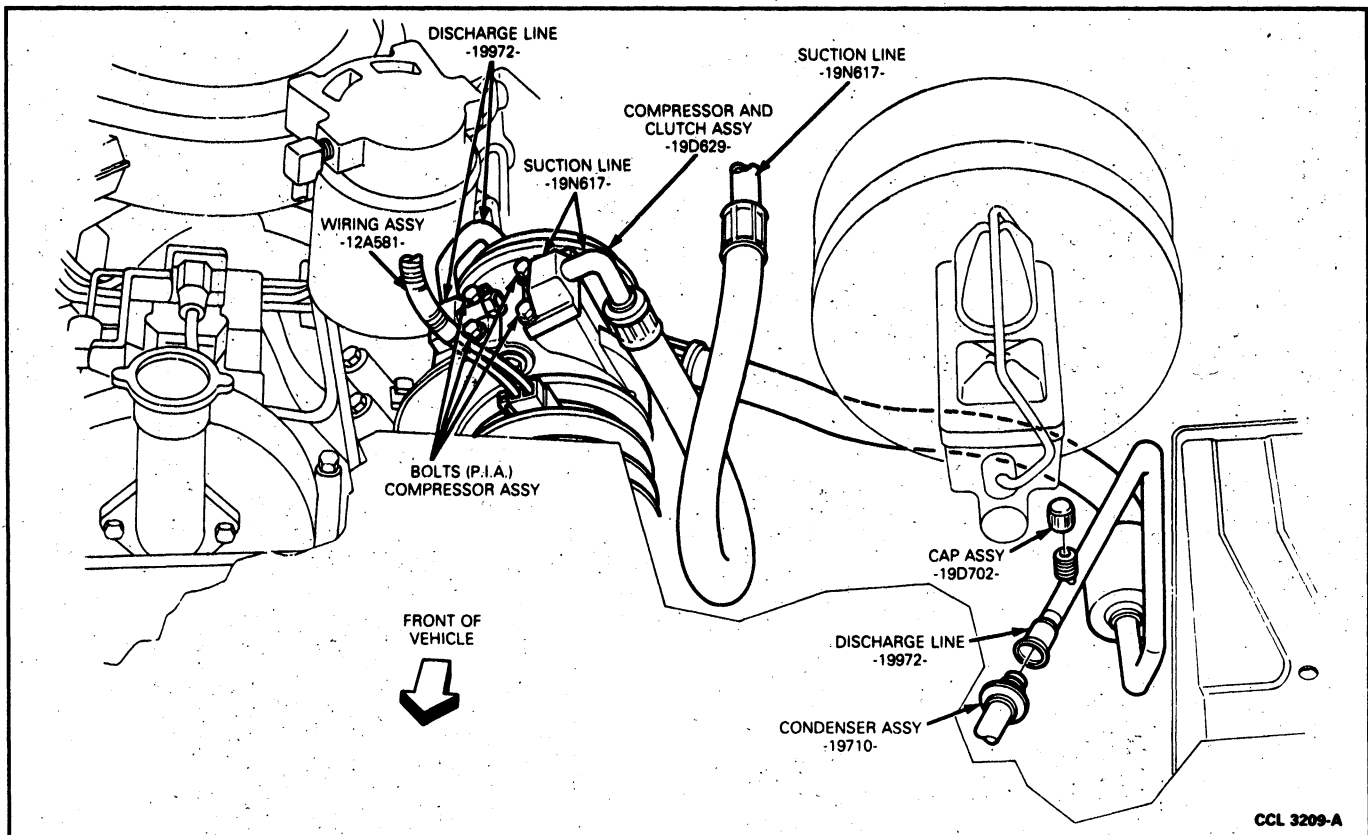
FX-15 Compressor Installation—5.0L and 5.8L Engines
